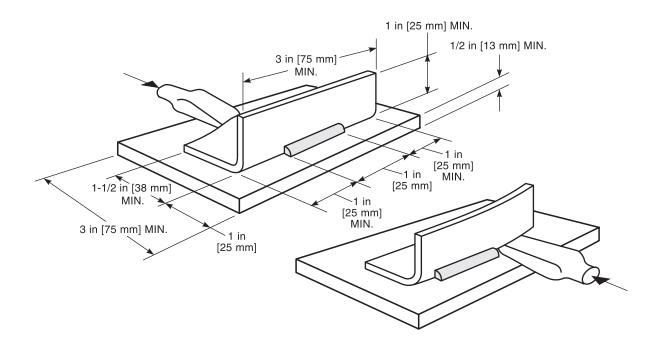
B—Test for Sheet to Supporting Structural Member Flare-Bevel-Groove Welds [see 4.6.3.2(1)(b)]
